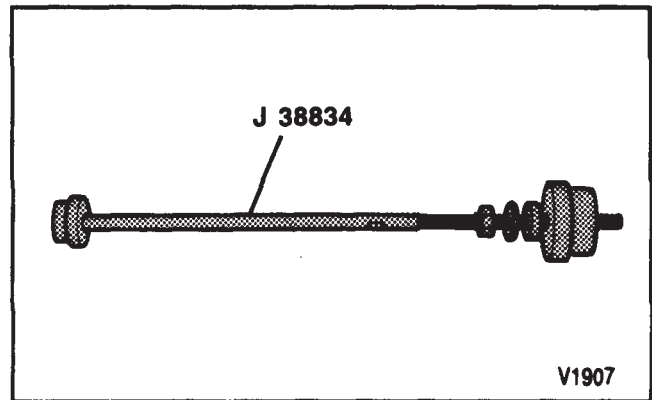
J 38834 Positioned to Install Balance Shaft Rear Bearing
